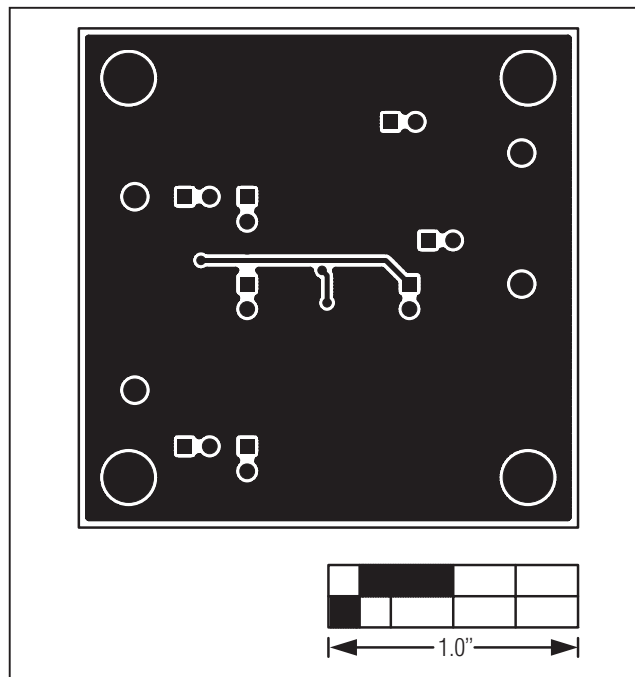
MAX4231 EV Kit PCB Layout—Solder Side
